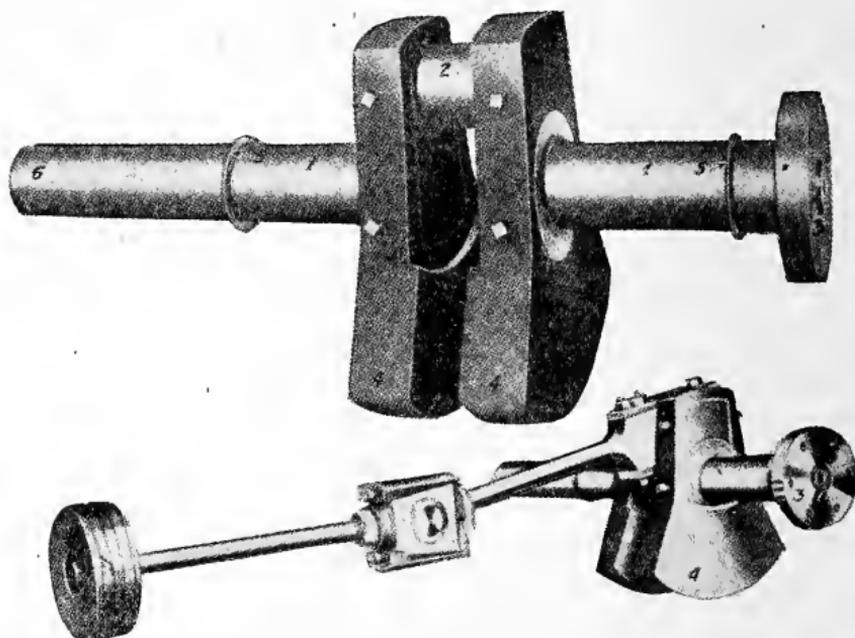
Connection of Piston, Crosshead, Connecting Rod, and Crank Shaft
